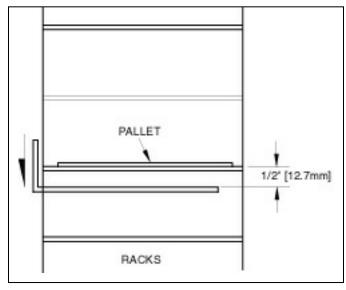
SWITCH LS-32 ADJUSTMENT.
